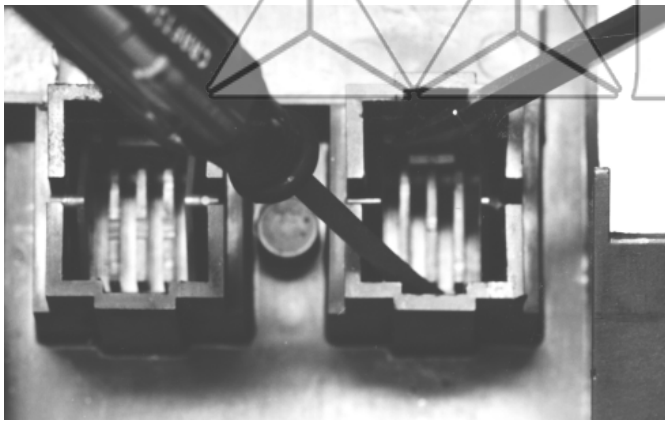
Removing the original On button from the breaker cover by pressing the locking tabs with two screwdrivers.
